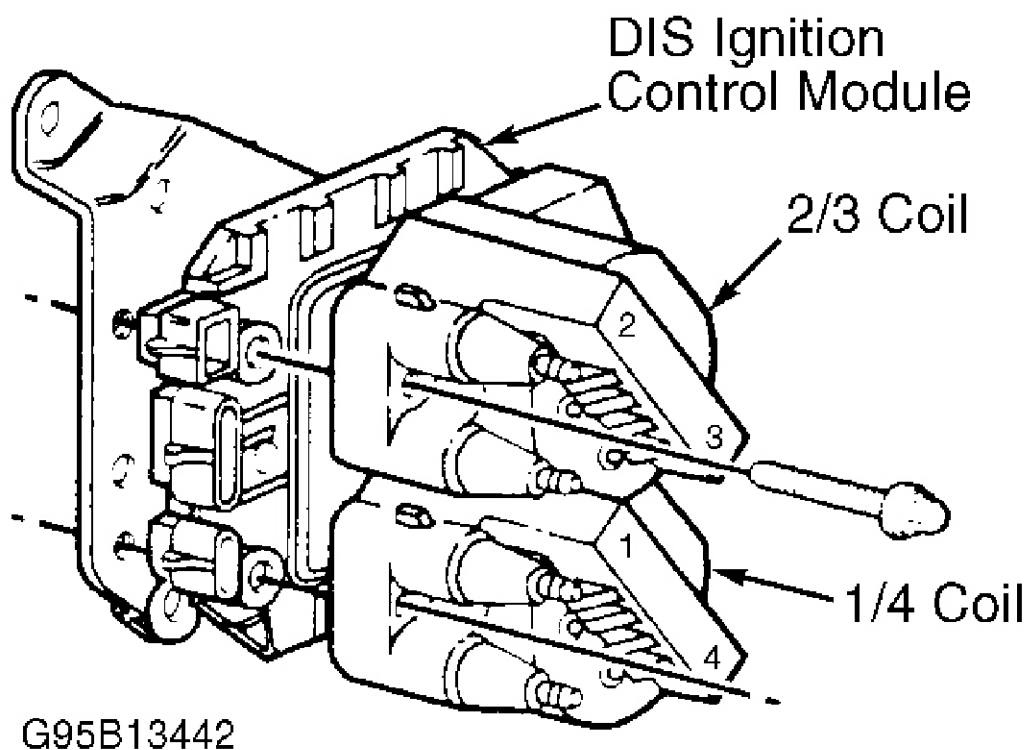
Locating Distributorless Ignition Control Module Components (2.2L Shown; 1.9L Is Similar)
